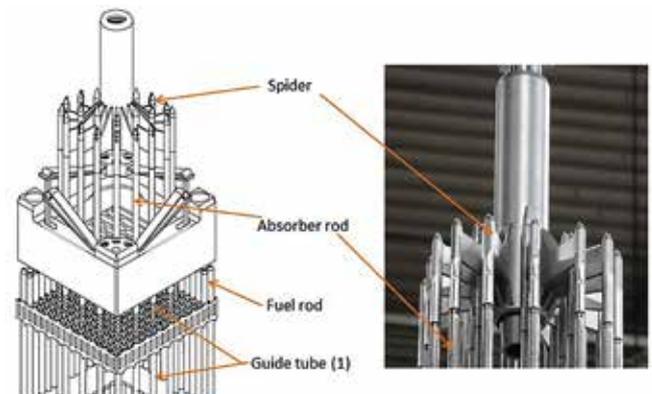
Standard design of AIC Rod Cluster Control Assembly [53]
